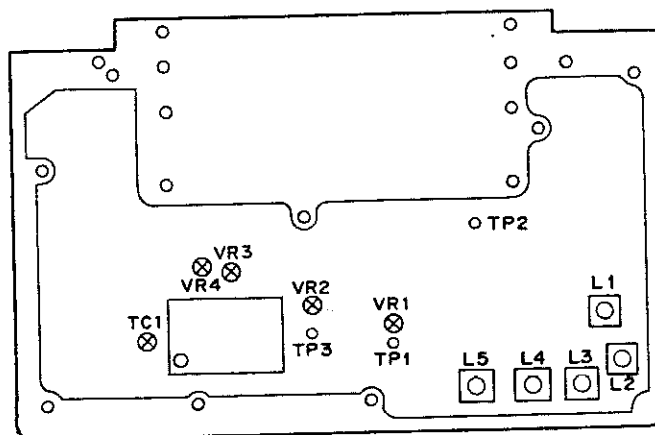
28 MHz Band adjustment: Component layout (upper view)
